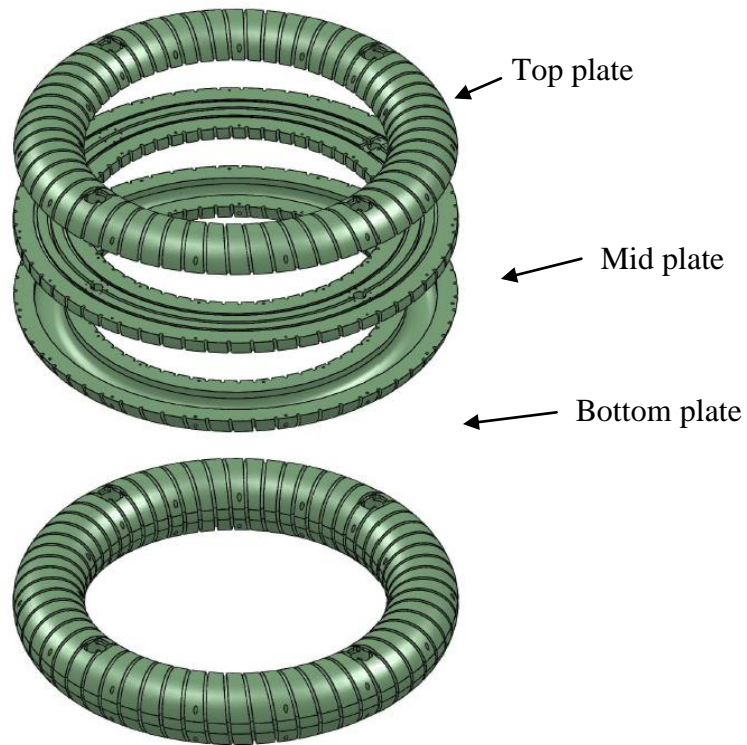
G-10 Glass/Epoxy Flux Core Winding Form. Upper view shows the plates which, when assembled, form a toroidal shaped winding form shown in the lower view with internal grooves to support the (4) PF turns and the TF cancellation turn and external grooves to support the (4) 15-turn segments of the TF windings.
